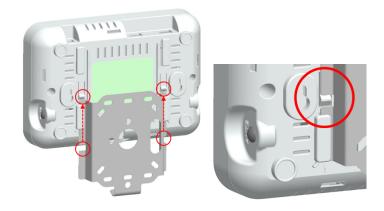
Figure 6 - imagotag AP-2010 Locking Tabs
